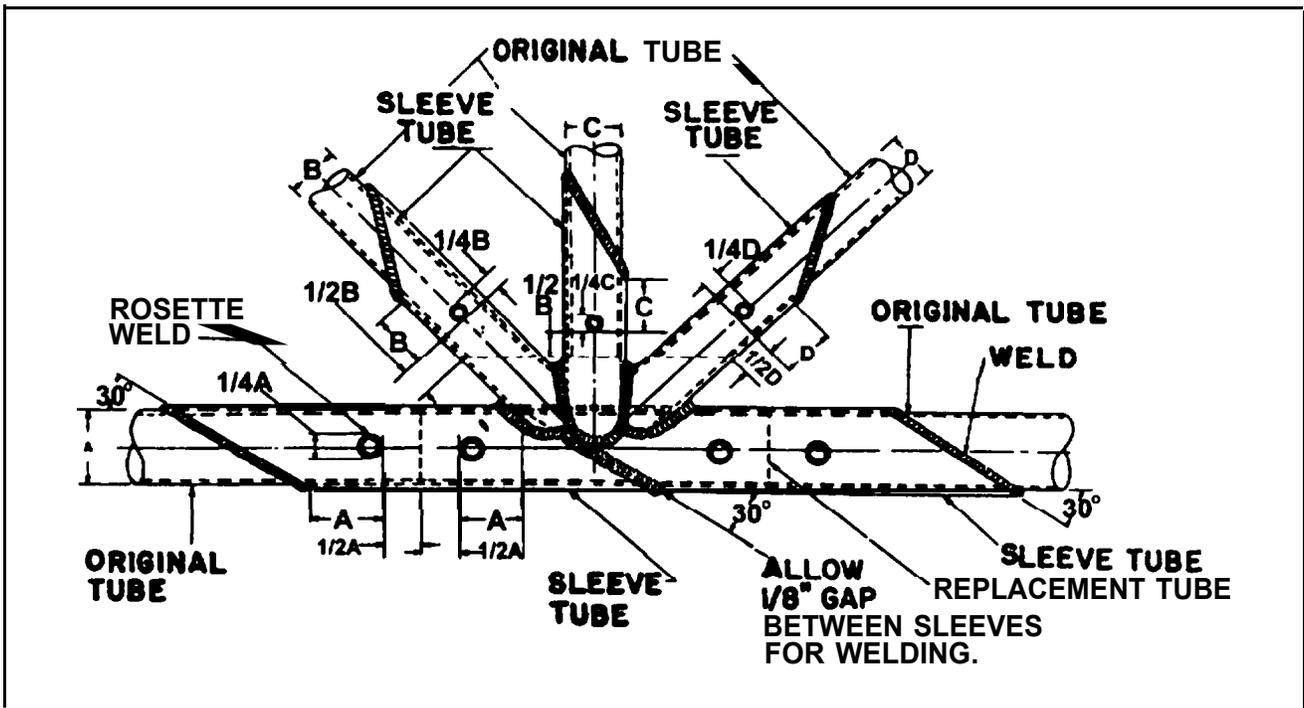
Tube replacement at a station by welded outer sleeves.
